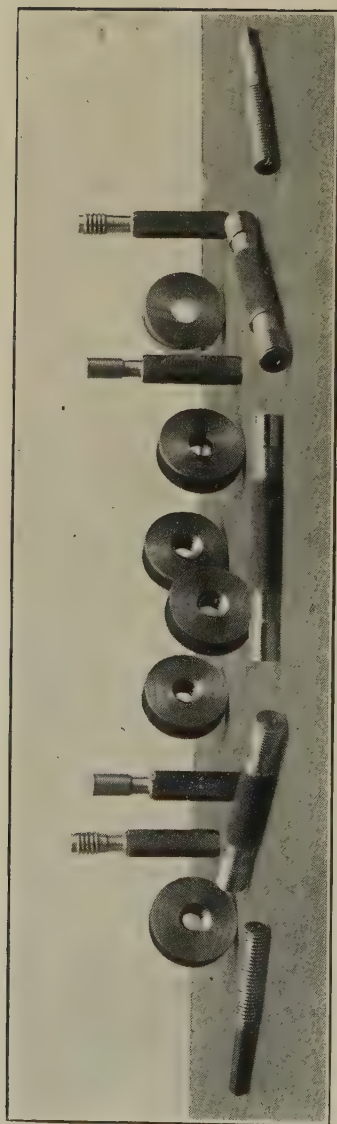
A SET OF GAUGES AND CHECKS FOR INSPECTION OF TAP DIAMETERS.
